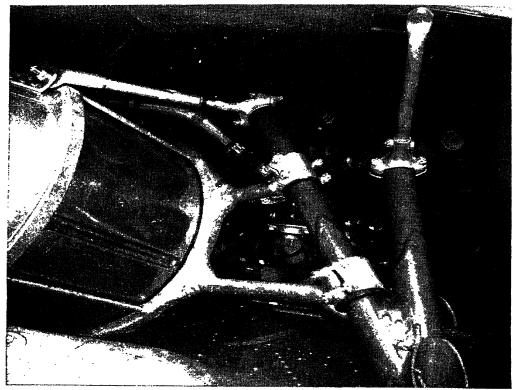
Oil-radiator installation on a Douglas DC-3 showing different welds.
